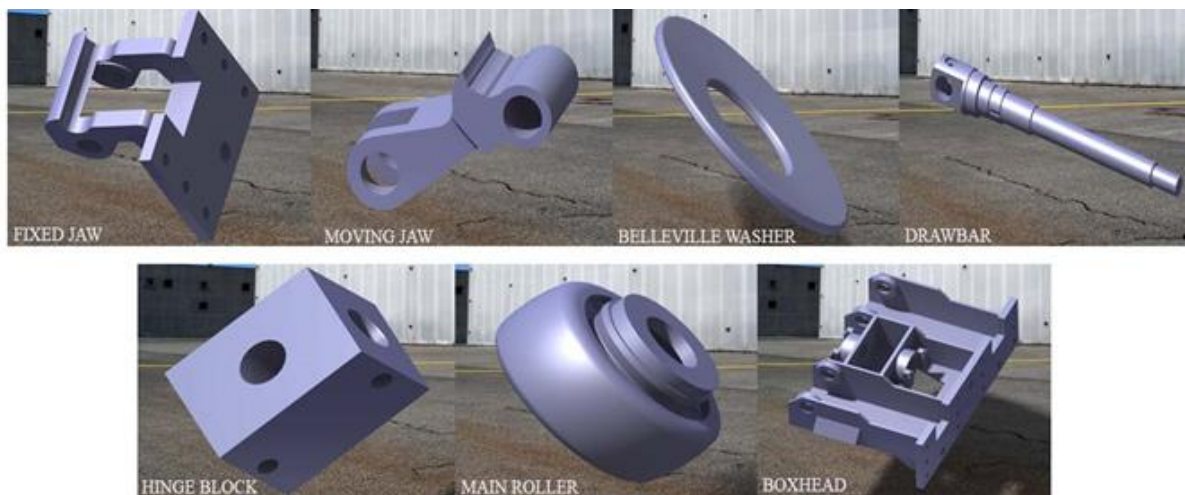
CATIA Model of the important parts in the Carriage assembly
